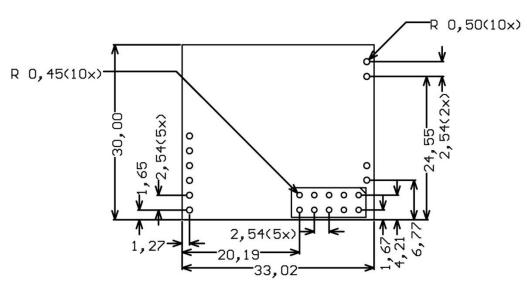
Mechanical dimensions and position of pads of MBUS-M13 (values are in mm)
